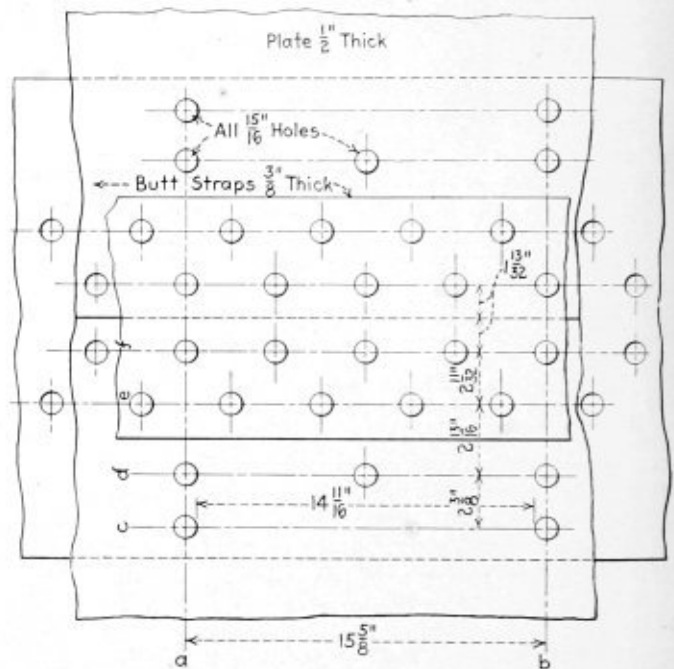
Quadruple Riveted Butt Joint for $\frac{1}{2}$ -Inch Plate
